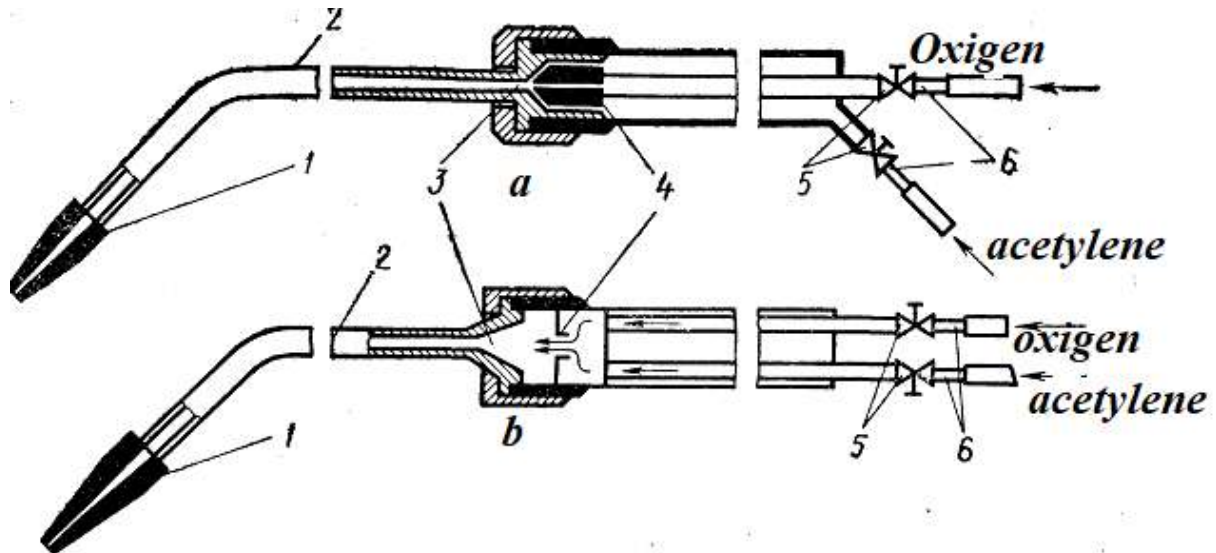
Schemes of acetylene burners: *a* – injection; *b* – without injection
